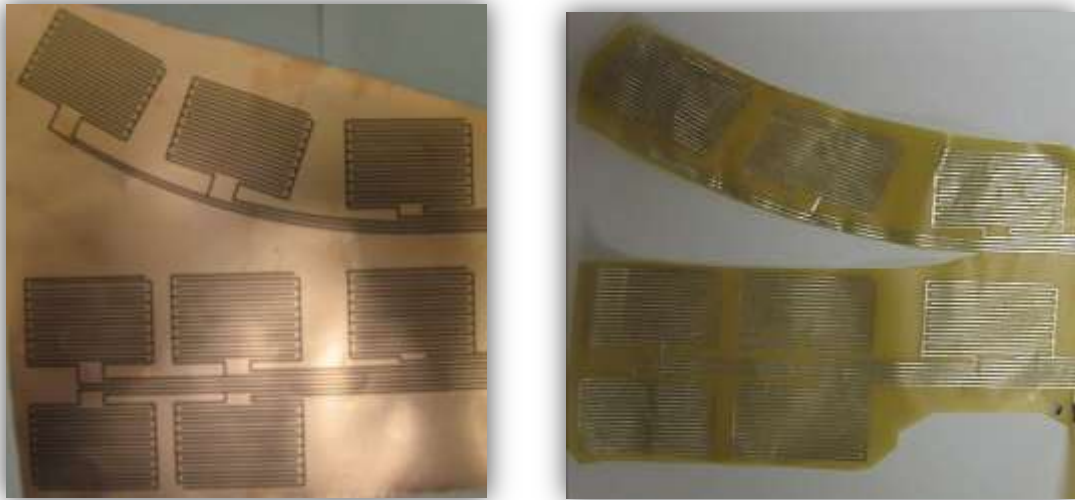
Conductive side forearm sensor matrix printed using solid ink on copper clad sheeting and etched.
